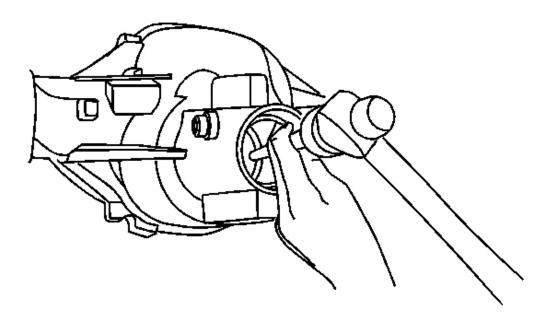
Removing Outer Pinion Bearing Cup Courtesy of GENERAL MOTORS CORP.
